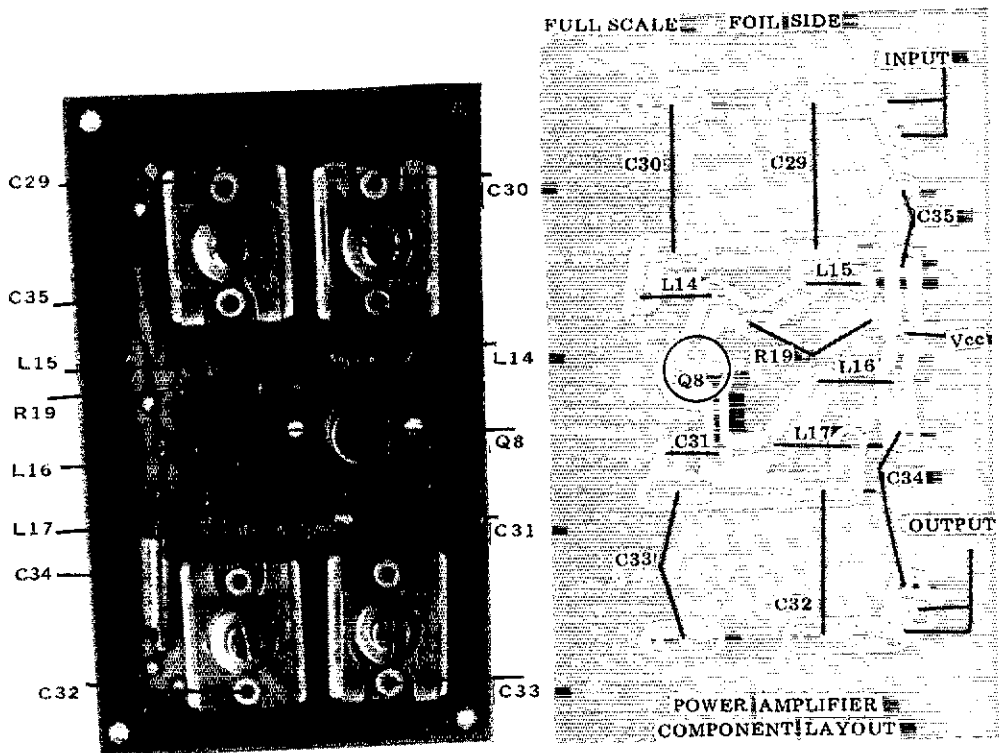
Full-size template and parts placement for the power amplifier board.
